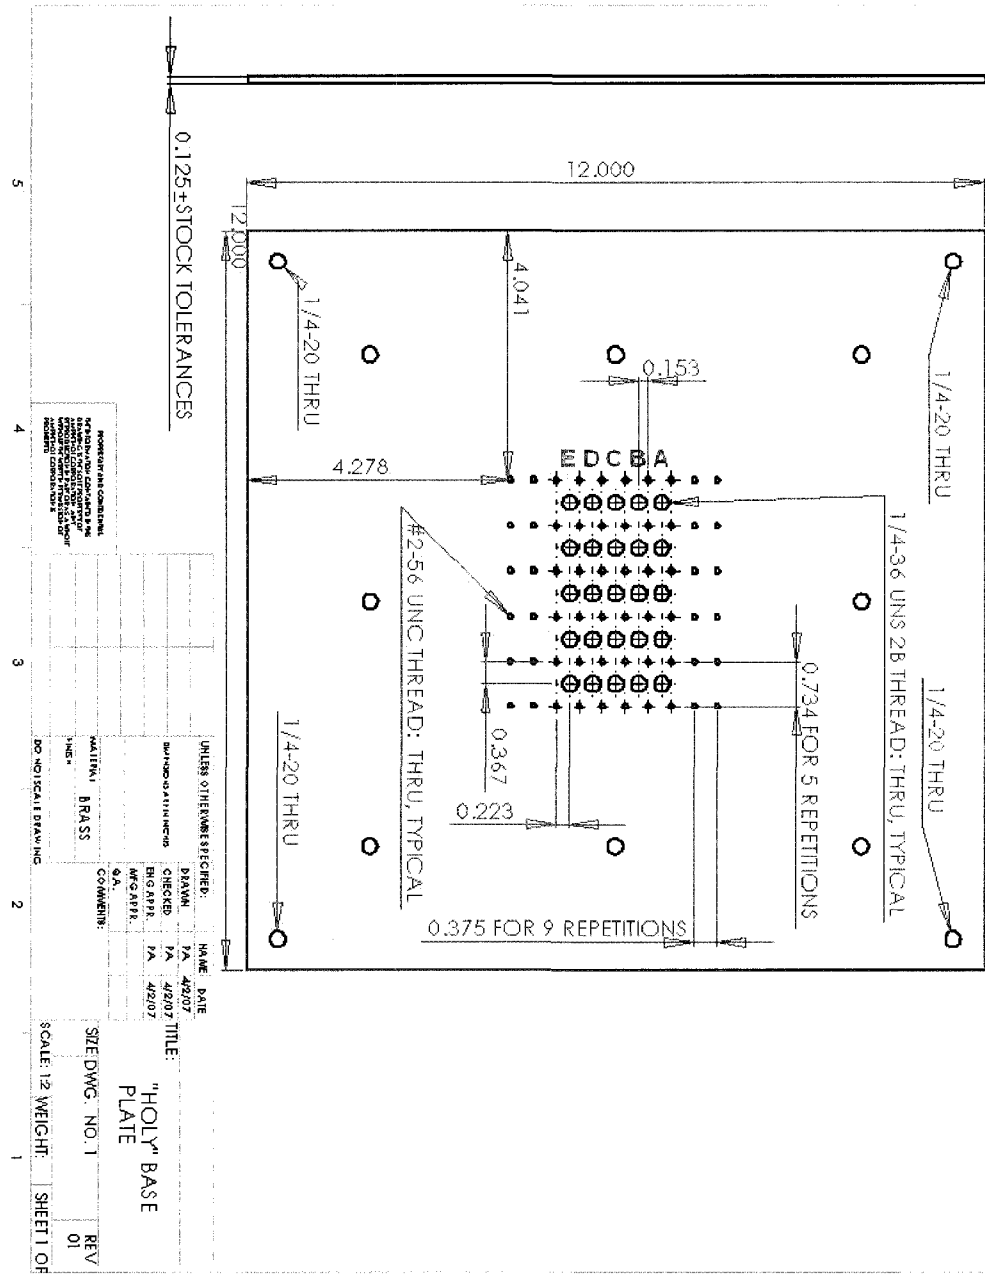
Mechanical drawing of the SMTL connector structure feed plates.
